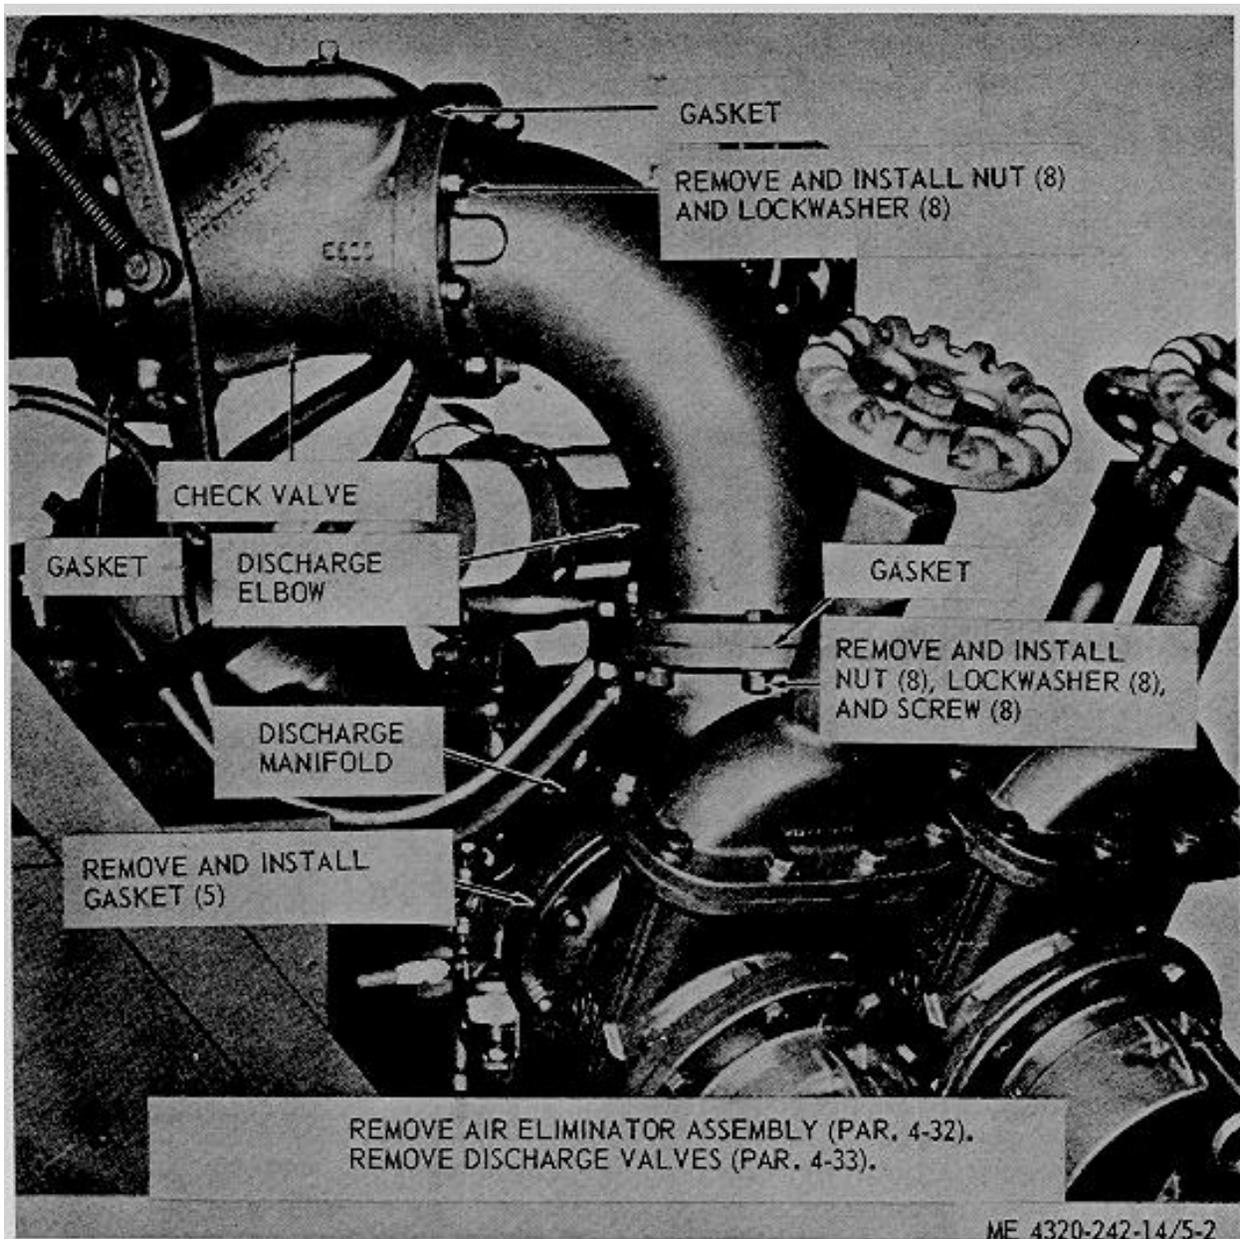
Discharge manifold elbow and check valve. removal and installation.
